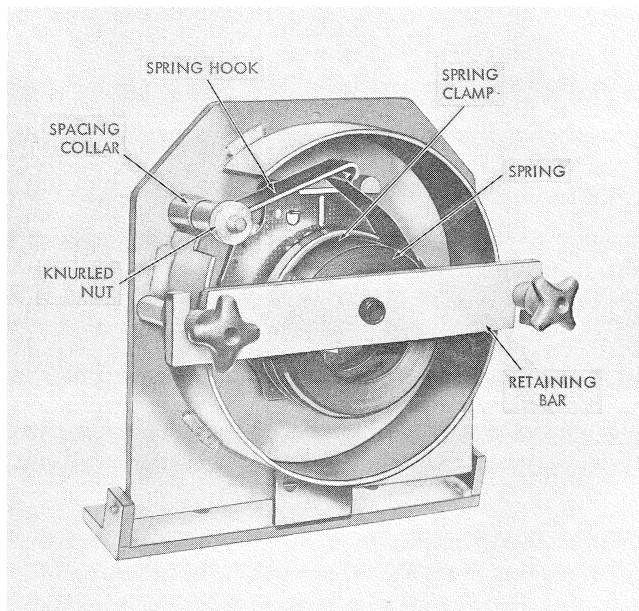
Mechanism and Driving Spring in Holding Fixture
